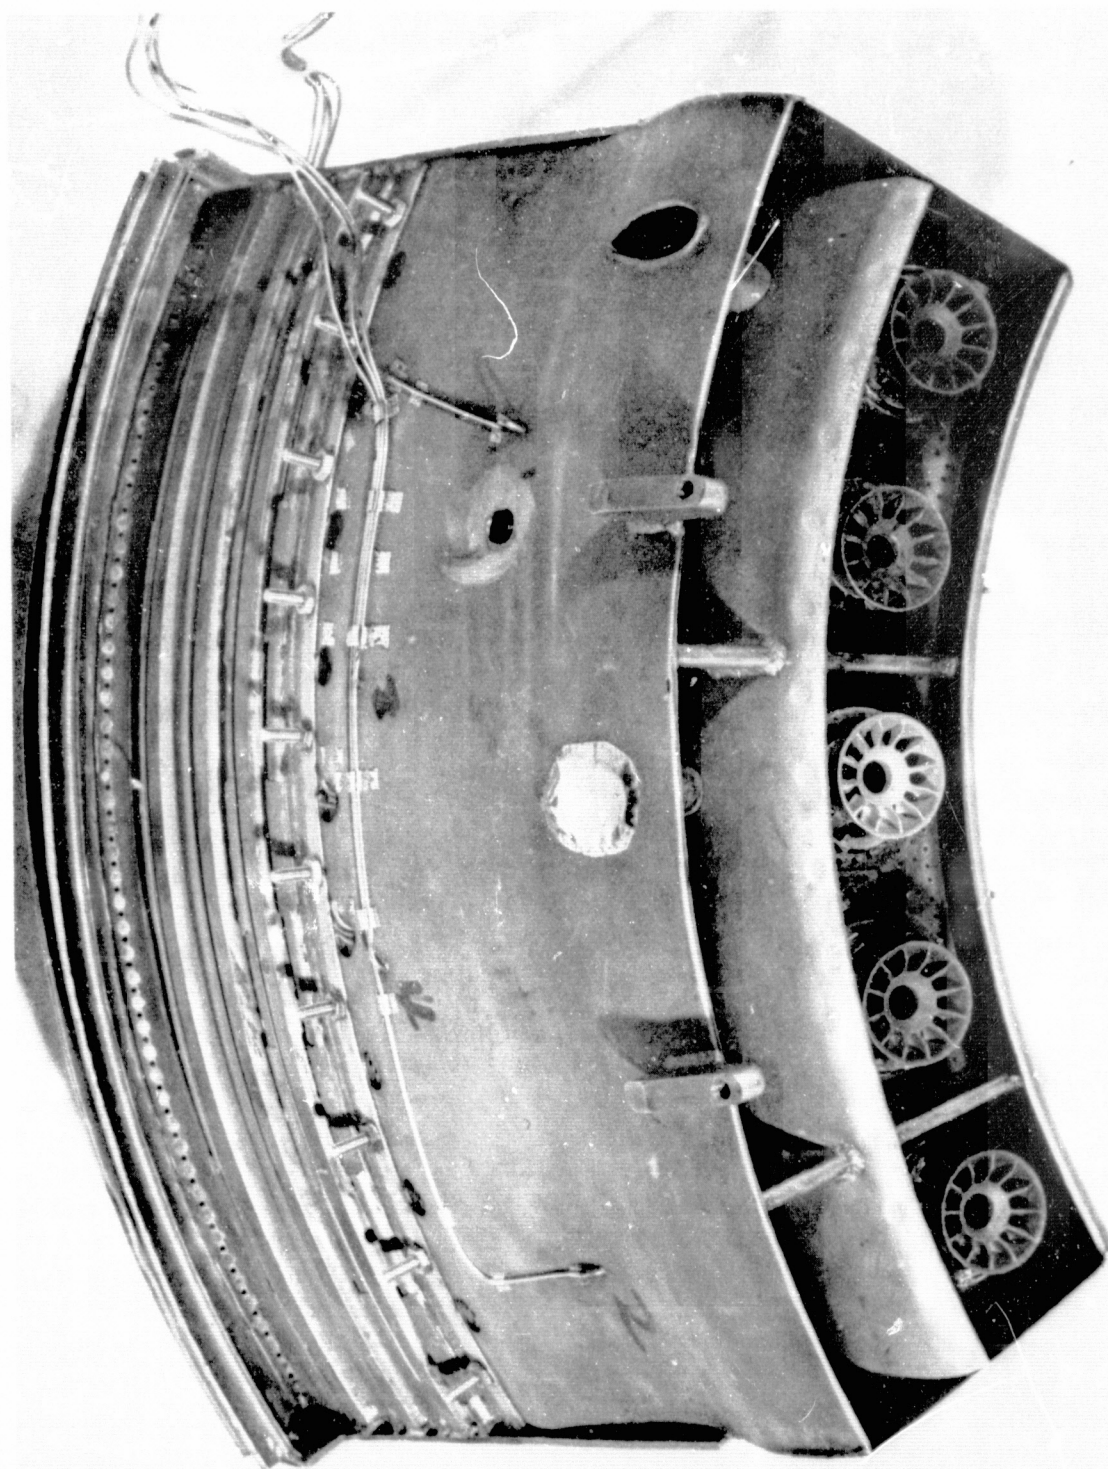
Radial/Axial Staged Sector Combustor Assembly.
